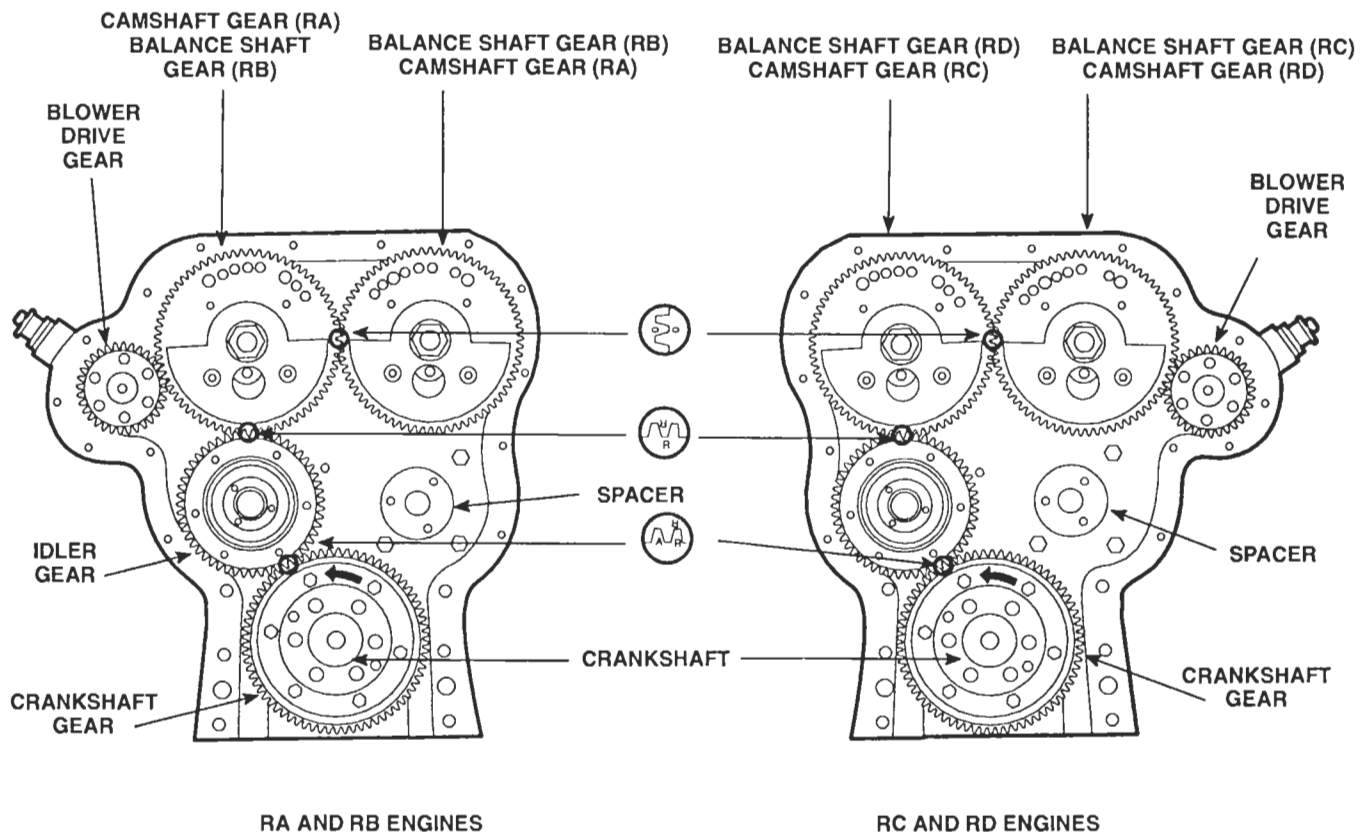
Gear Train and Timing Marks – Right-Hand Rotation Engines (Standard Timing Shown)
